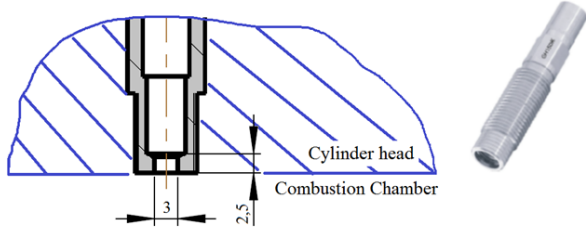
Piezoelectric pressure sensor and installation details at engine cylinder head
